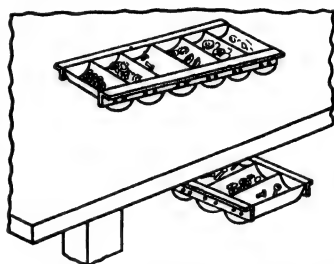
Small round cans slit lengthwise, opened out, and riveted to pieces of light angle iron make convenient trays, or drawers, for small parts.
